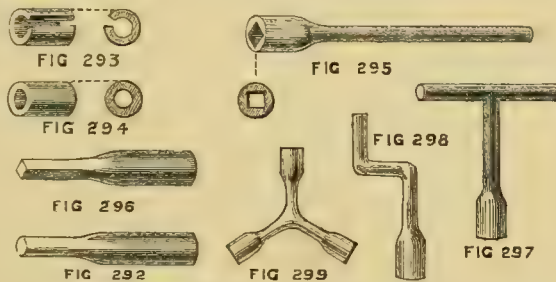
ROUND MANDREL. FIG. 293.—SLEEVE FOR SOCKET, OPEN. FIG. 294.—DO., CLOSED. FIG. 295.—SOCKET WELDED TO SHANK. FIG. 296.—SQUARE-ENDED MANDREL. FIGS. 297, 298.—KEY SPANNERS. FIG. 299.—BOX BED KEY.
